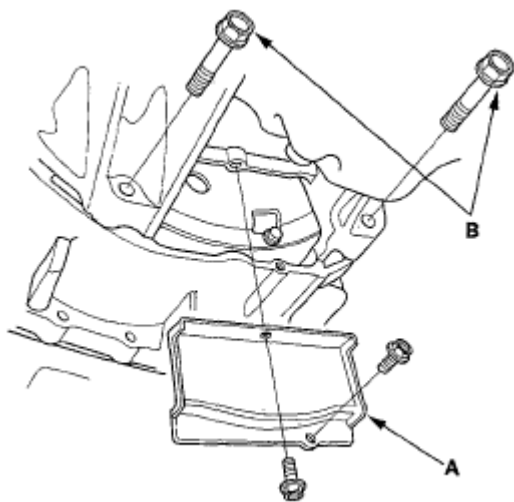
Identifying Torque Converter Cover And Transmission Mounting Bolts
